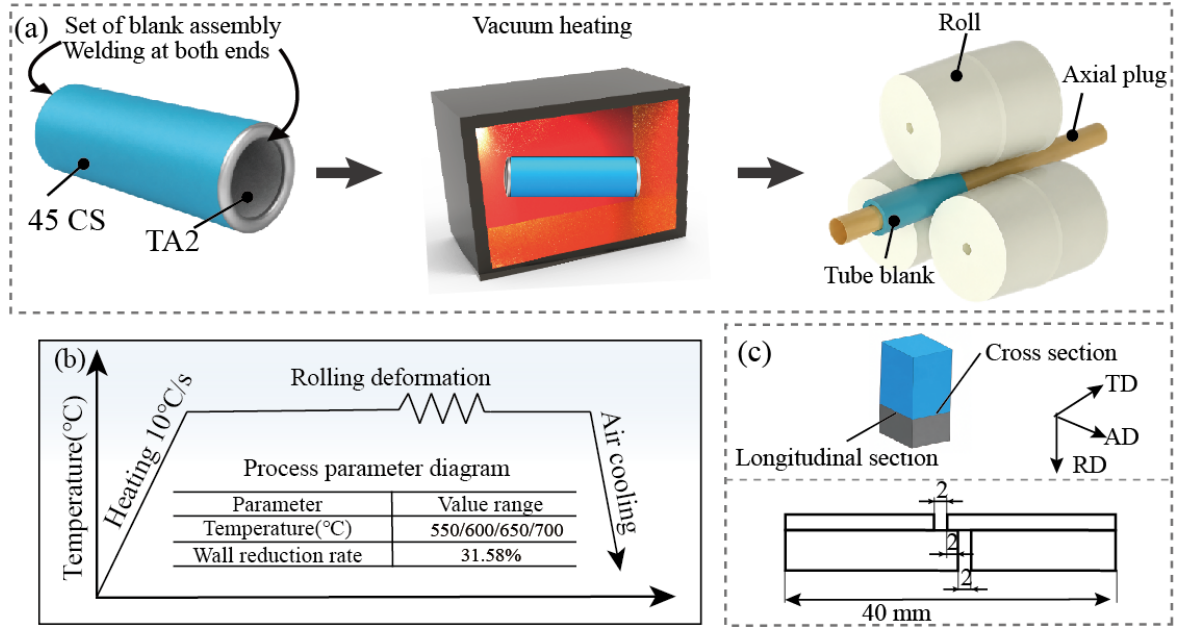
Schematic of the three-roll skew rolling and specimen sampling of the 45CS/TA2 bimetallic composite tube: (a) billet assembly, vacuum heating, and rolling process; (b) thermomechanical route and key process parameters; and (c) sampling locations, orientations, and dimensions.
